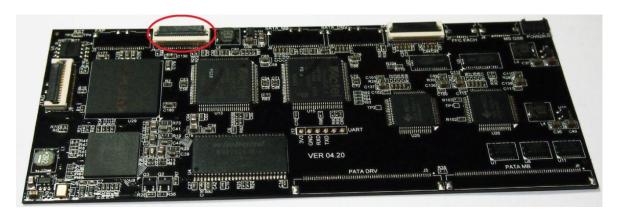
Cobra ODE mainboard with highlighted connector (clip-on PCB side).
